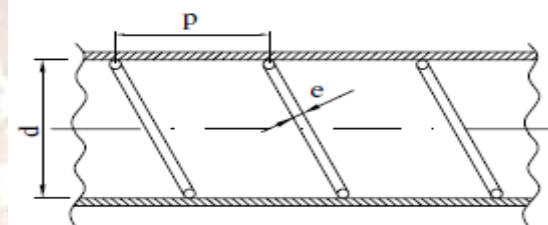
Sketch of a helical-wire-coil fitted inside a smooth tube [1].
